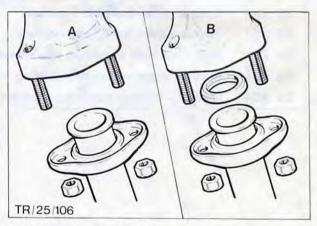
Exhaust manifold front down pipe clamp A – Diesel variants without sealing ring
